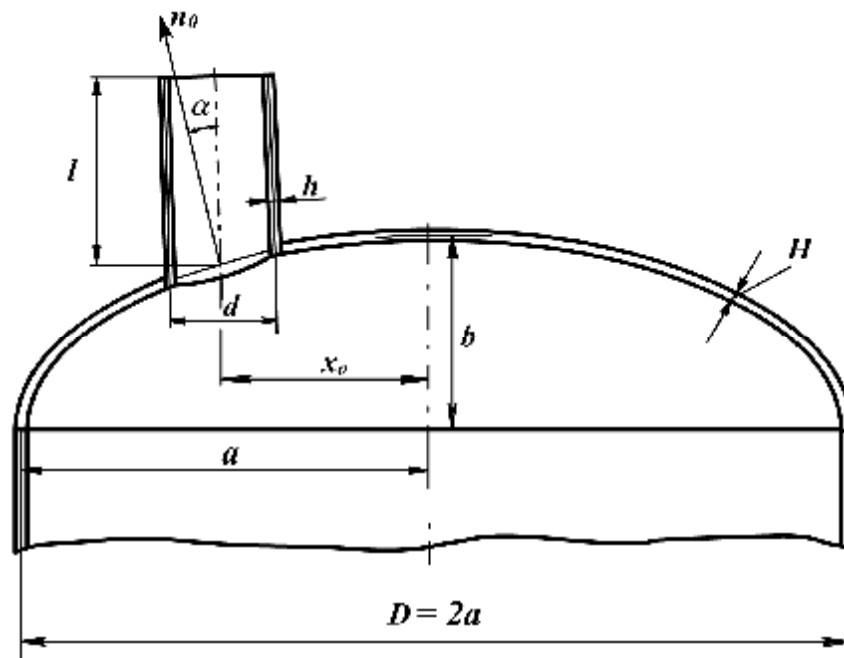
Ellipsoidal head and nozzle shell intersection geometry.
